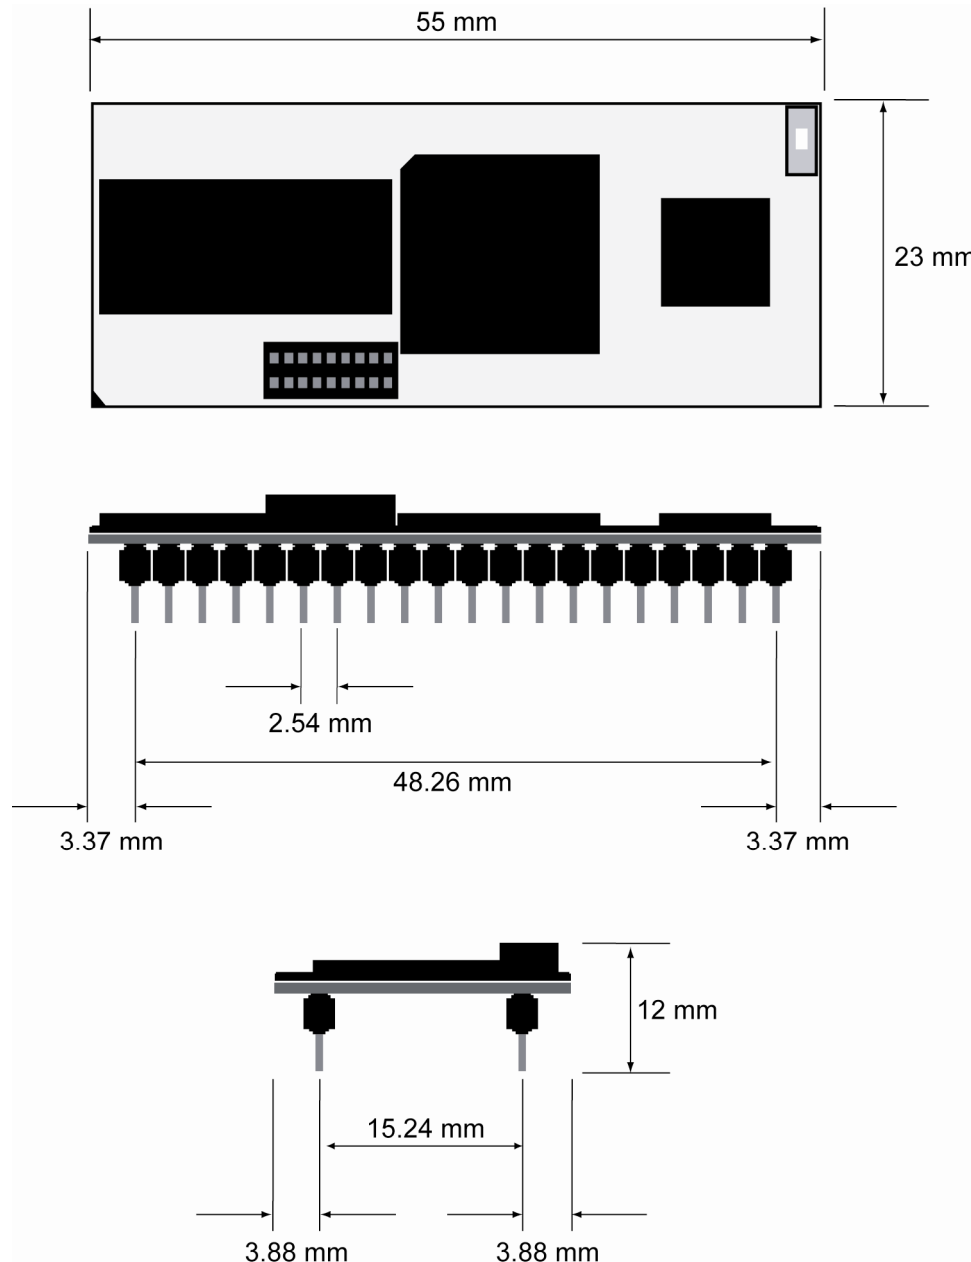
Mechanical dimensions of DIL/NetPC DNP/9265
